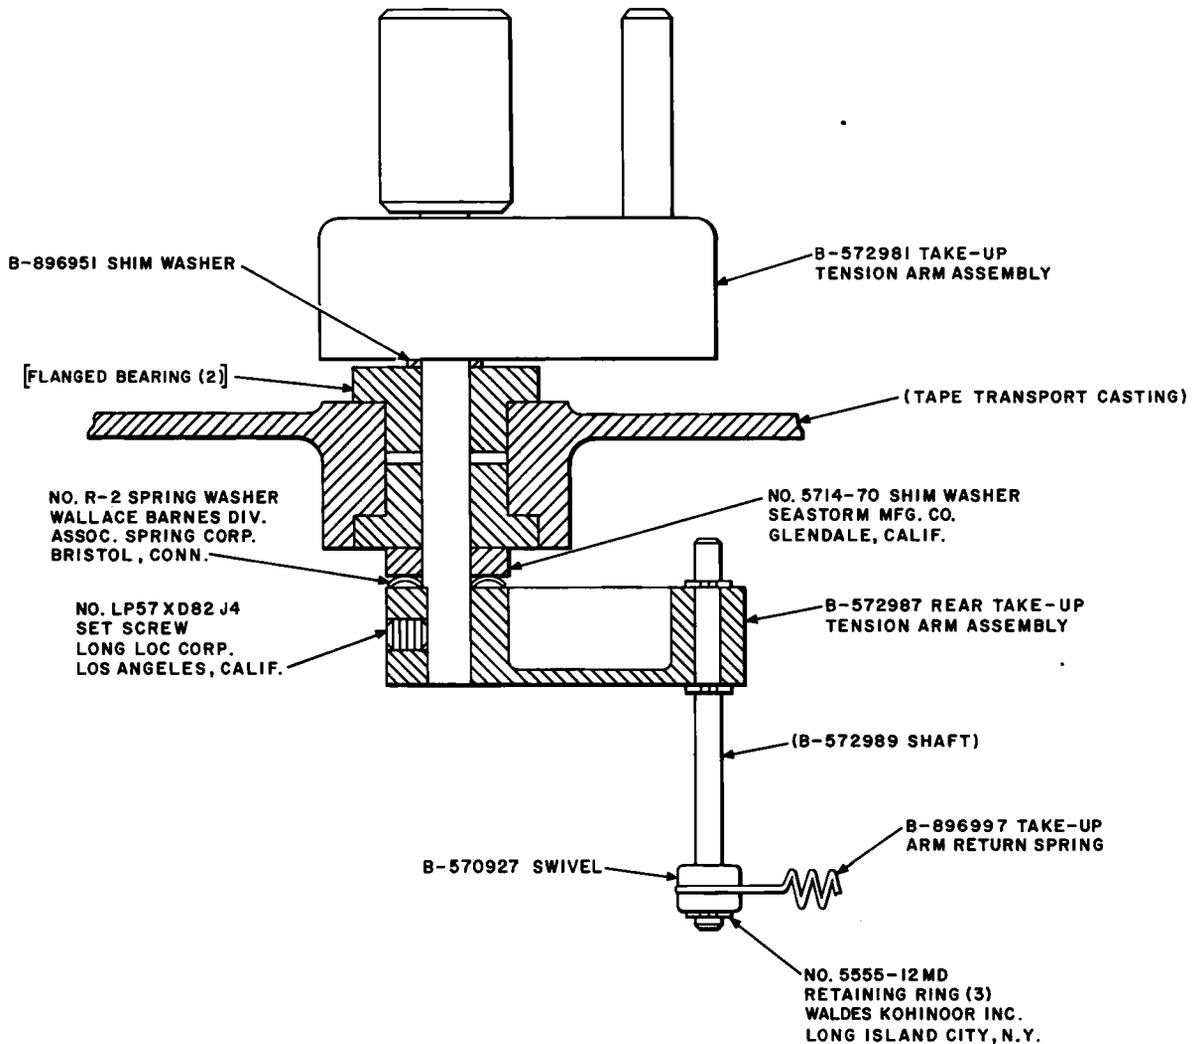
Sectional View of Take-Up Tension Arm and Associated Parts
